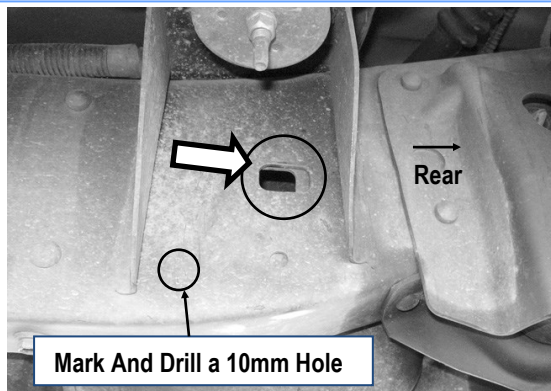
Driver Front Mounting Bracket (DFM) Installation
